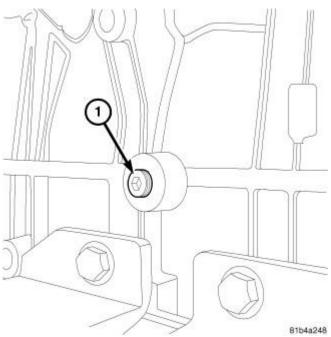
CRANKSHAFT LOCK PLUG LOCATION Courtesy of CHRYSLER LLC
